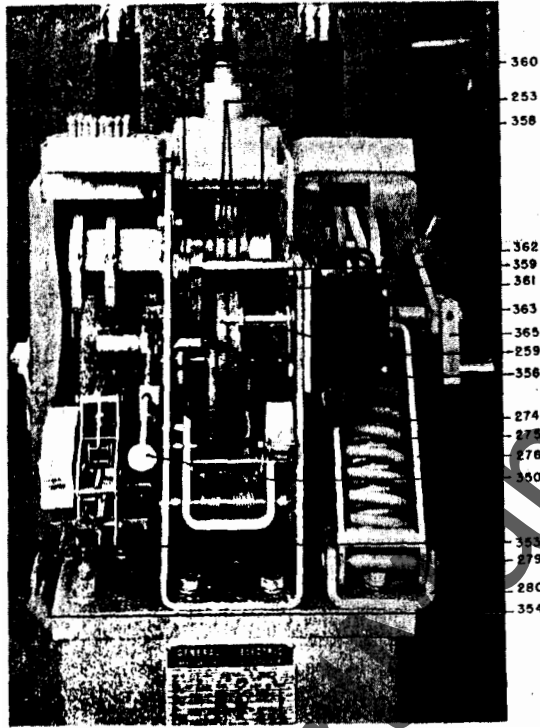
A MS-13 Mechanism - Front View (-4 Breaker)
